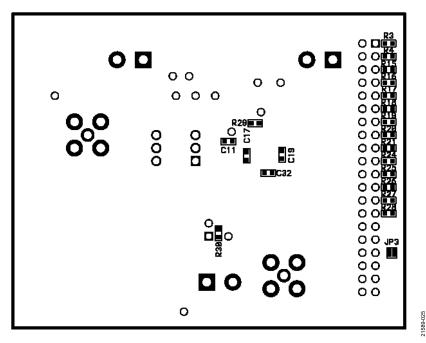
AD9740ACP-PCBZ/AD9742ACP-PCBZ/AD9744ACP-PCBZ/AD9748ACP-PCBZ LFCSP Evaluation Board Layout Assembly—Secondary Side
